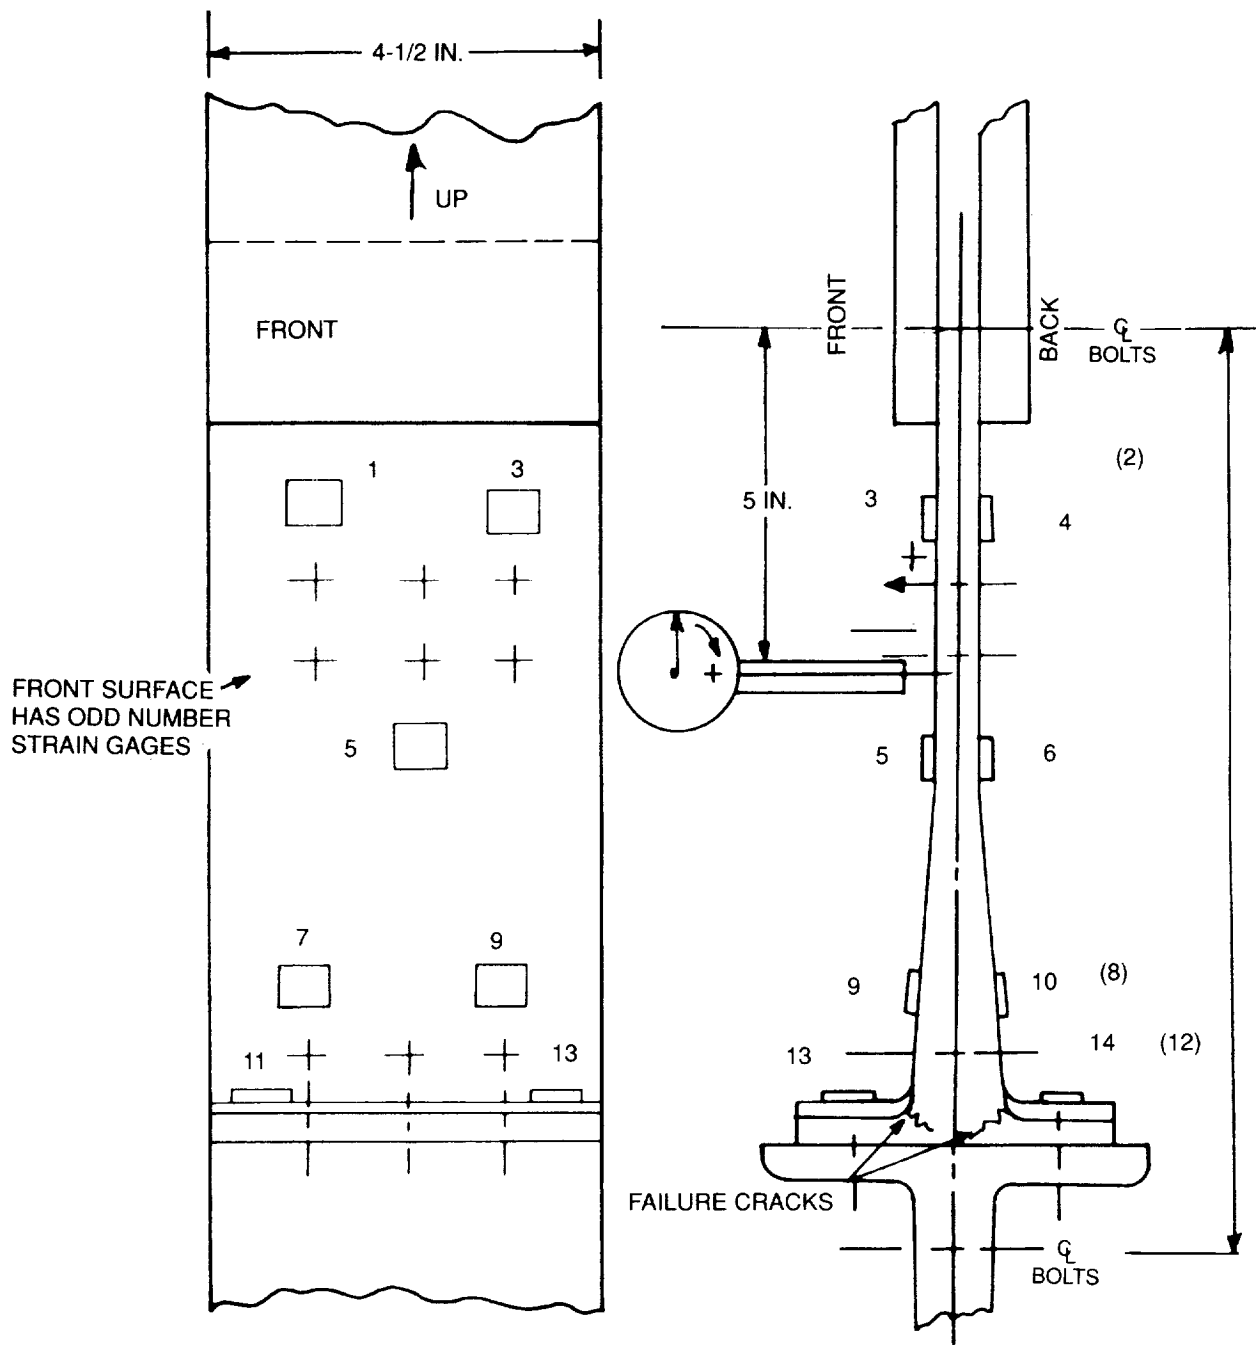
COMPOSITE FLANGED JOINT GAGE LOCATIONS
